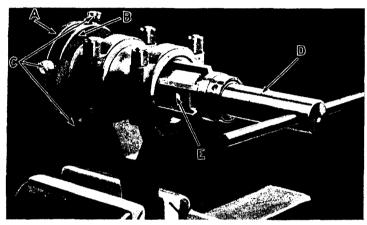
Reaming Crankpin Bearing with Reamer 79255
